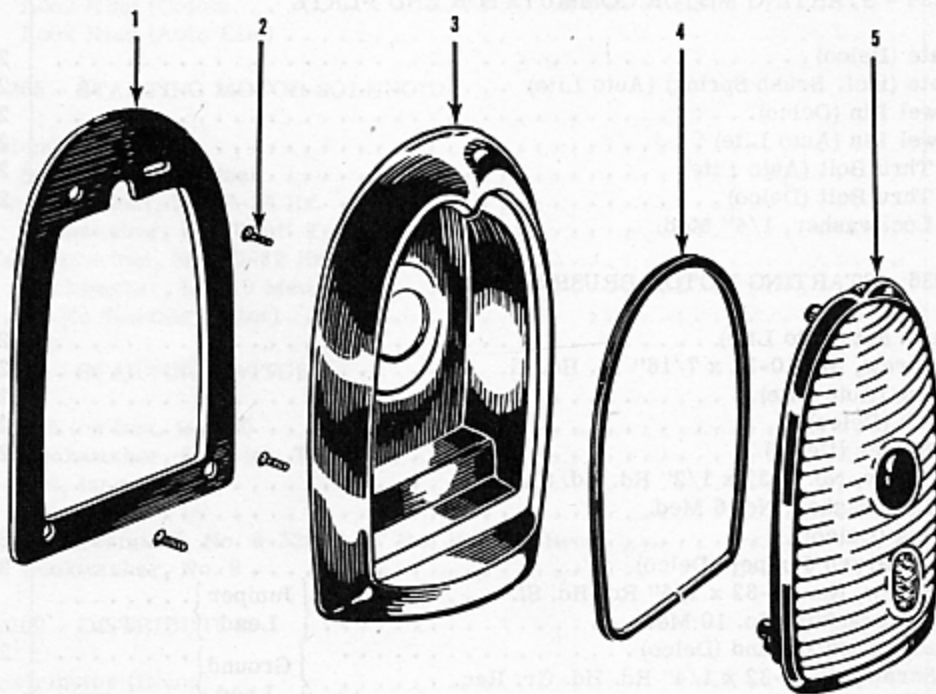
TAIL, STOP AND DIRECTIONAL LIGHT - EXPLODED VIEW
